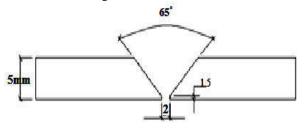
Schematic showing the geometry of the single-V groove design used C. Welding of base plates
